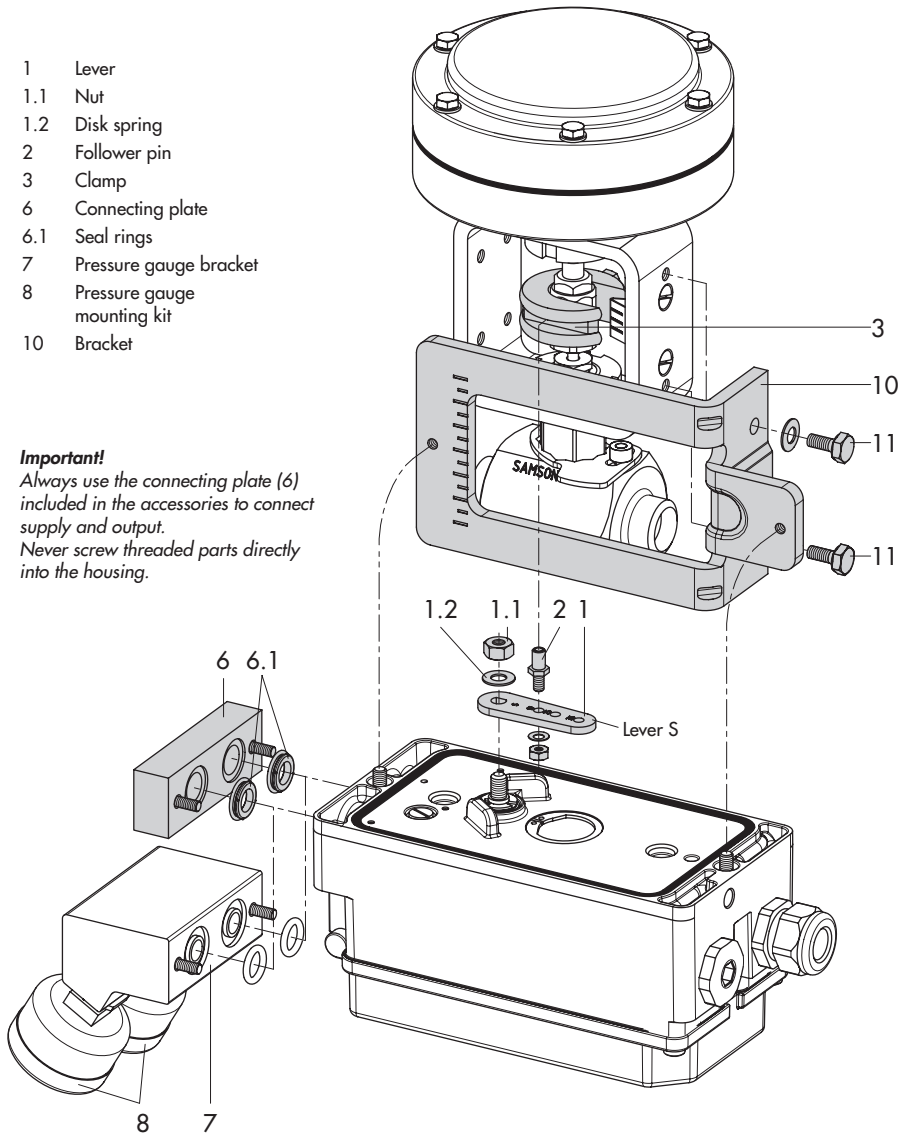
· Attachment to Type 3510 Micro-flow Valve
